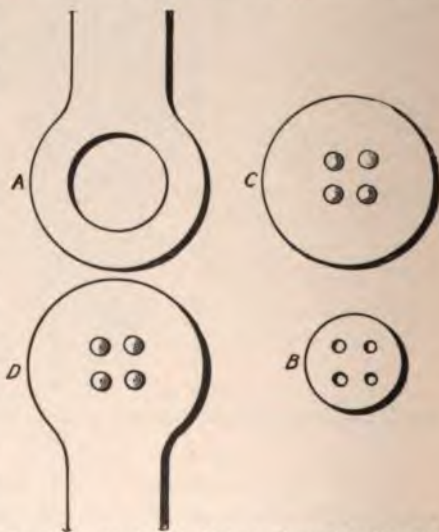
Steel joint. Holes in B: rivets in C and D.
